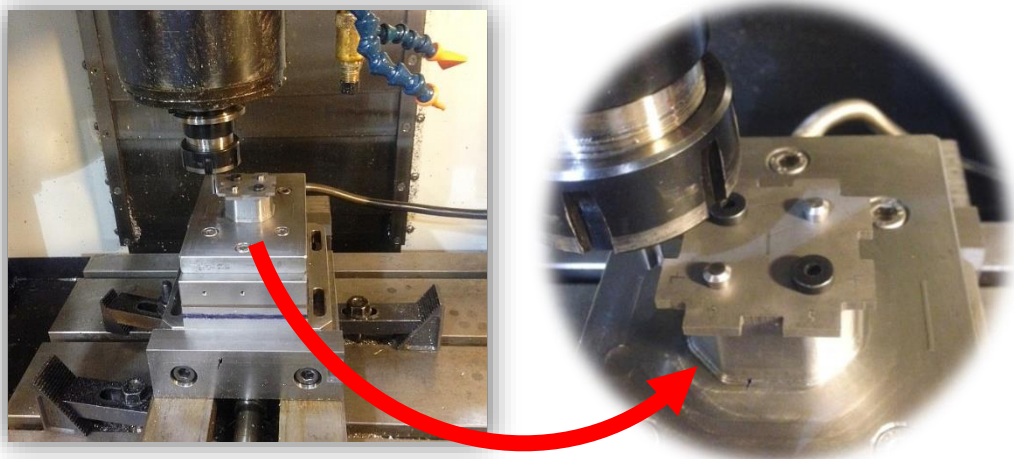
Experimental setup for force acquisition during side milling of porous tungsten. A specialized fixture, shown in the right hand image, was developed to hold a plate of porous tungsten containing 8 samples.
